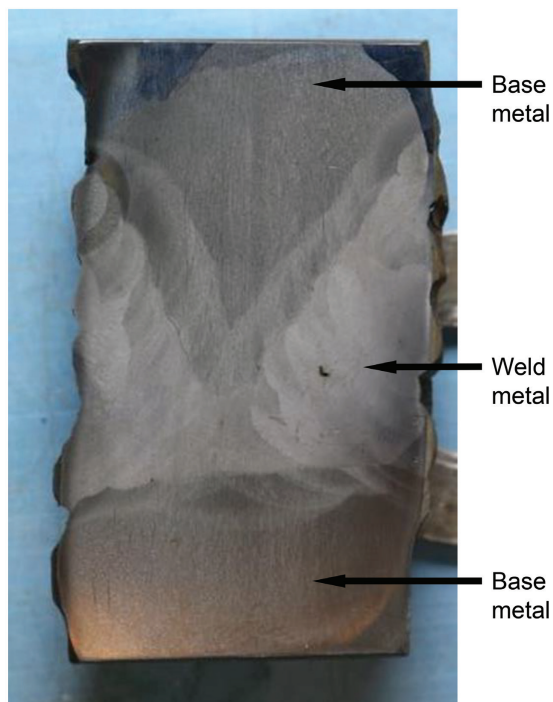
Weld sample removed for testing (photo courtesy of Simpson Gumpertz & Heger).
